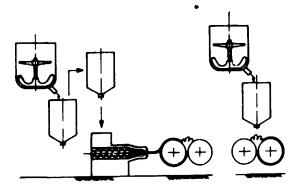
Turbo-rapid mixer - single-screw compactor mill processing sequence
